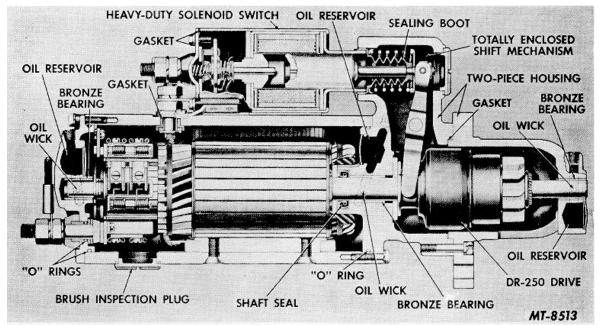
Sectional View of Starting Motor with DR-250 Heavy Duty Drive
